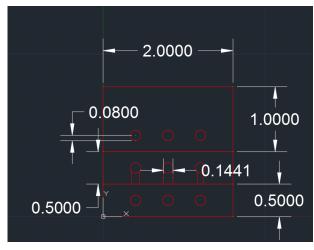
Stepper Plates AutoCAD Drawing, Dimensions in Inches
